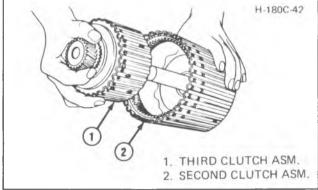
Installing Third Clutch Assembly Into Second Clutch Assembly
